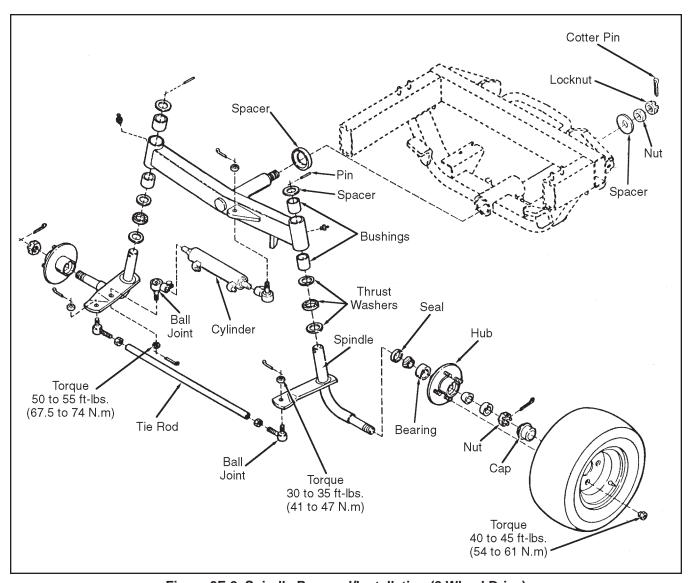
F-2. Spindle Removal/Installation (2 Wheel Drive)
